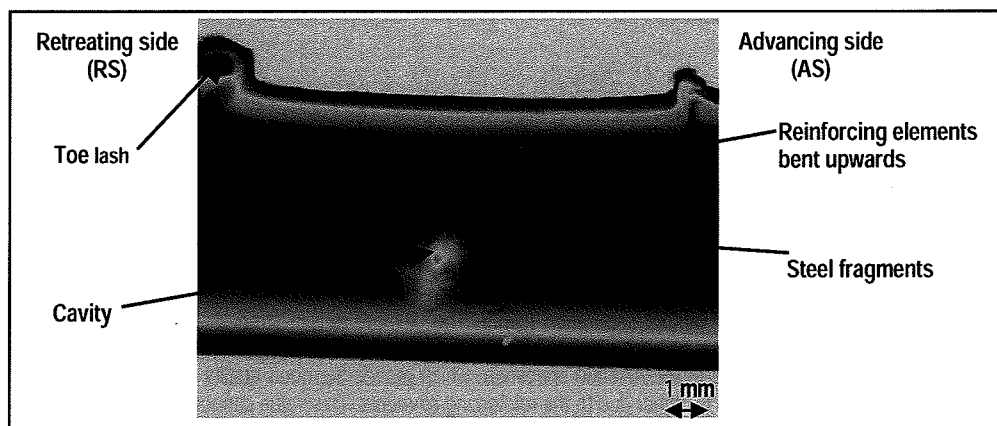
$\mu$ CT photo through an FSW joint (cross section of the weld seam)
